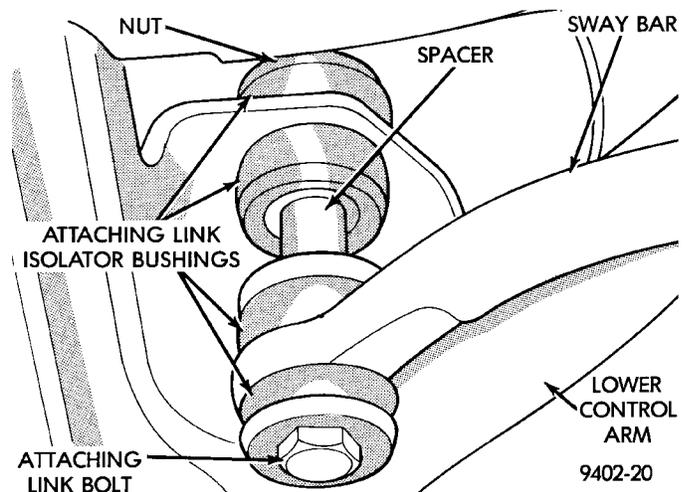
Stabilizer Bar Attaching Link Assembly Bushing Orientation
